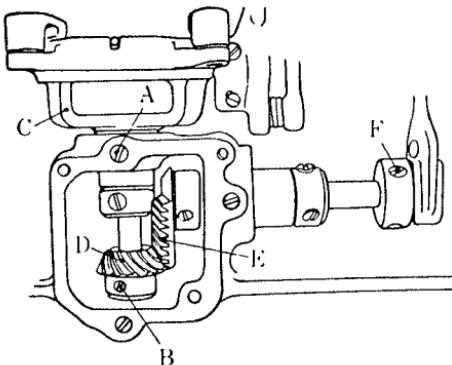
On White Models 764 and 769, the shuttle-needle clearance is set by moving the shuttle body shaft laterally along the shaft's axis. When this adjustment is complete, make the sure the gears D and E mesh properly.
